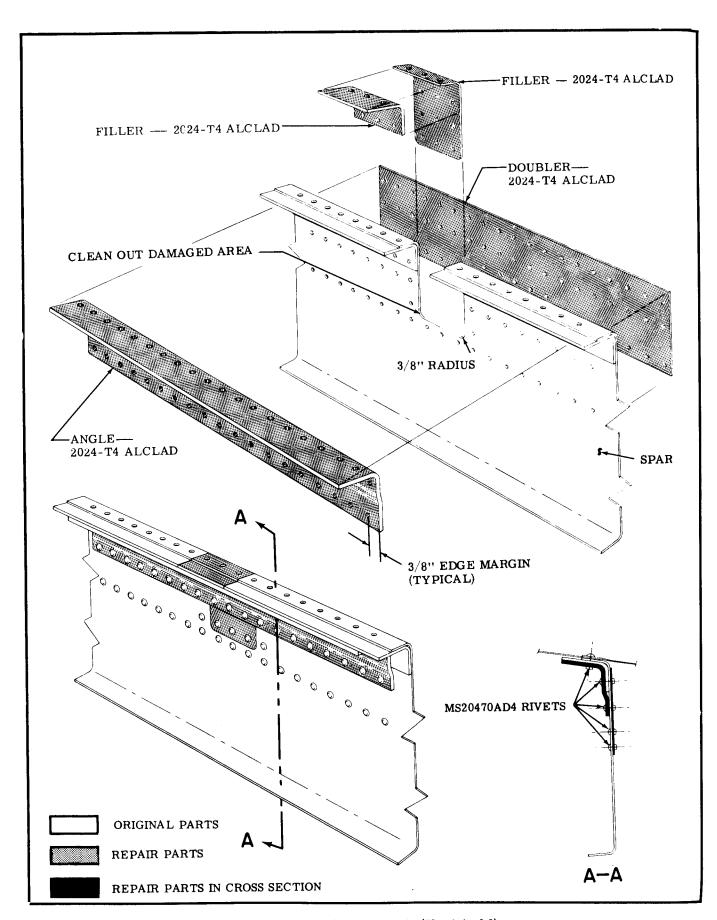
Rib Spar Repair (Sheet 1 of 3)
